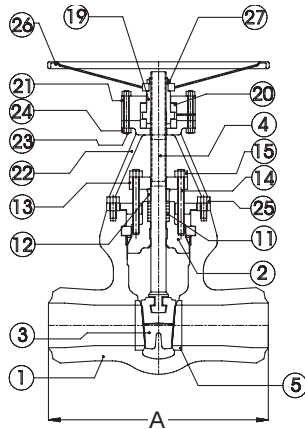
B-F Flex Wedge, Butt Weld Ends
